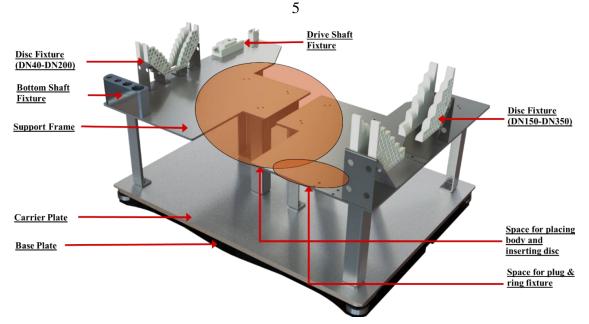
Product carrier [39] The figure shows all the different fixtures placed on the PC. Each component has an assigned location on the carrier, and there is ample space available for placing the plug & ring fixture.
